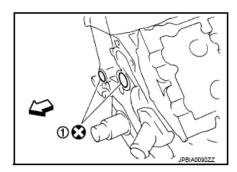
Identifying Cylinder Block O-Rings Courtesy of NISSAN NORTH AMERICA, INC.
